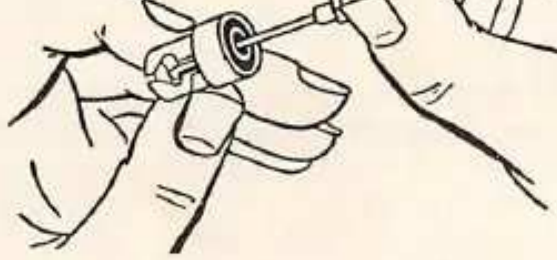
Use brass seat tool to remove carbon from valve seat.
